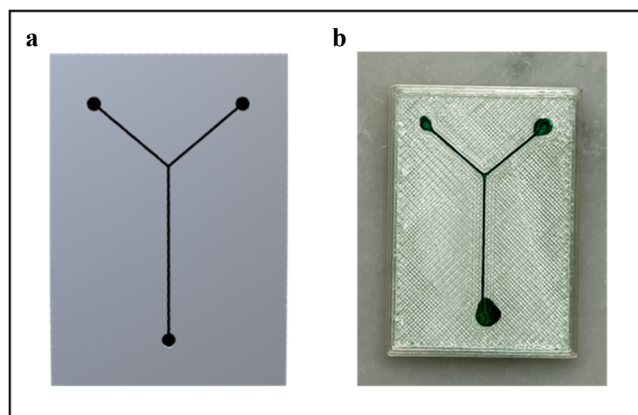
a) CAD design of Y-Shaped open channel; b) FDM printed sample with green ink showing the channels
